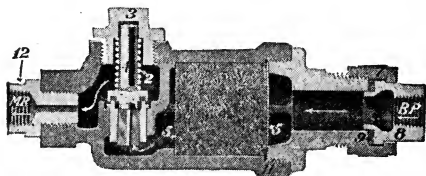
,011.—Westinghouse combined air, strainer and check valve. With the cut out cock open, air from the brake pipe enters at *BP*, passes through the curled hair strainer, lifts check valve 4, held to its seat by a strong spring 2, passes through the choke bushing, and out at *MR*, to the main reservoir, thus providing pressure for operating the brakes on the locomotive. The double heading cock should be closed, and the handle of each brake valve should be in running position. Where absence of water in the boiler, or other reason, justifies keeping the maximum braking power of such a locomotive lower than the standard, this can be accomplished by reducing the adjustment of the safety valve on the distributing valve. It can also be reduced at will by the independent brake valve. The strainer protects the check valve and choke from dirt. Spring 2, over the check valve insures this valve seating and, while assuring an ample pressure to operate the locomotive brakes, keeps the main reservoir pressure somewhat lower than the brake pipe pressure, thereby reducing any leakage from the former. The choke prevents a sudden drop in brake pipe pressure and the application of the train brakes, which would otherwise occur with an uncharged main reservoir cut in to a charged brake pipe.
